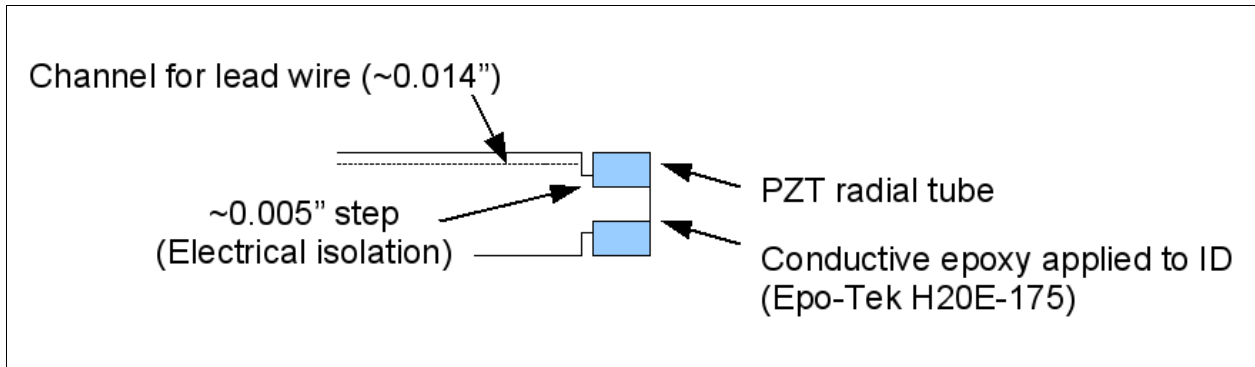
Design/assembly specifics for prototype cylindrical probe hydrophone.
